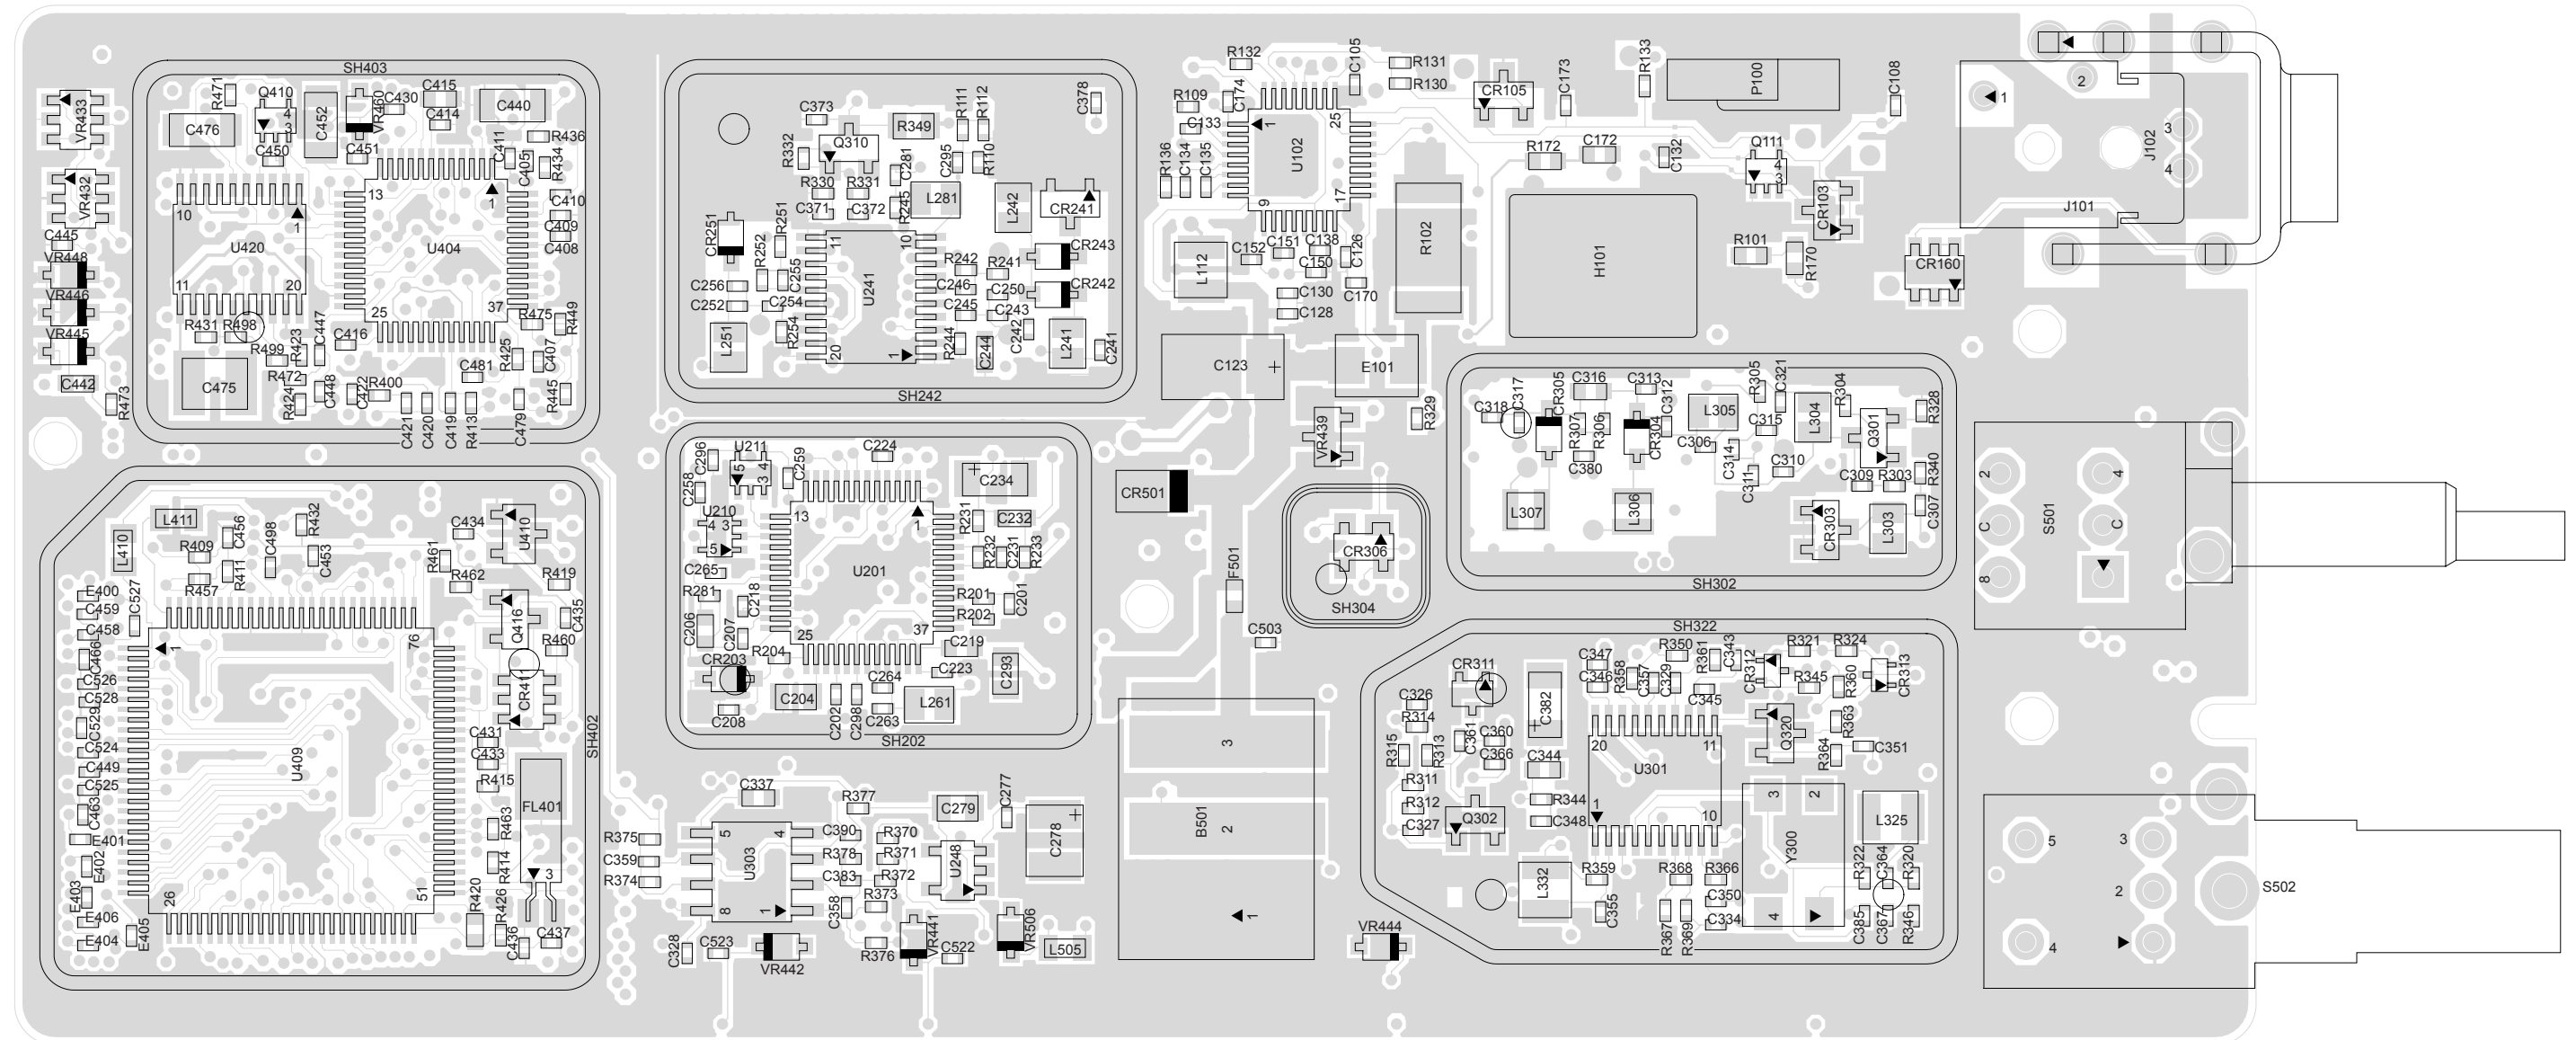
UHF (450–512 MHz) Main Board Bottom Side PCB 8486686Z02 rev. A
